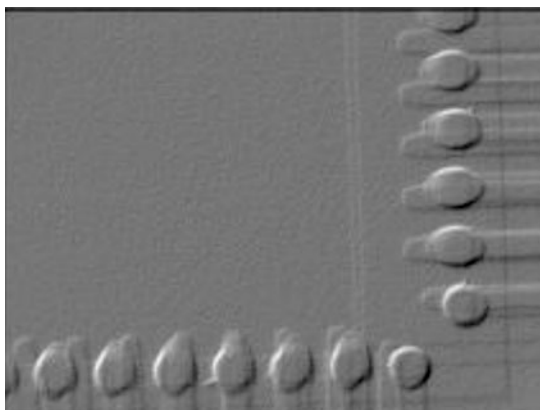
Solder extrusion in underfill (SEM image) for 95.5Sn3.5Ag1.0Cu solder bumps
